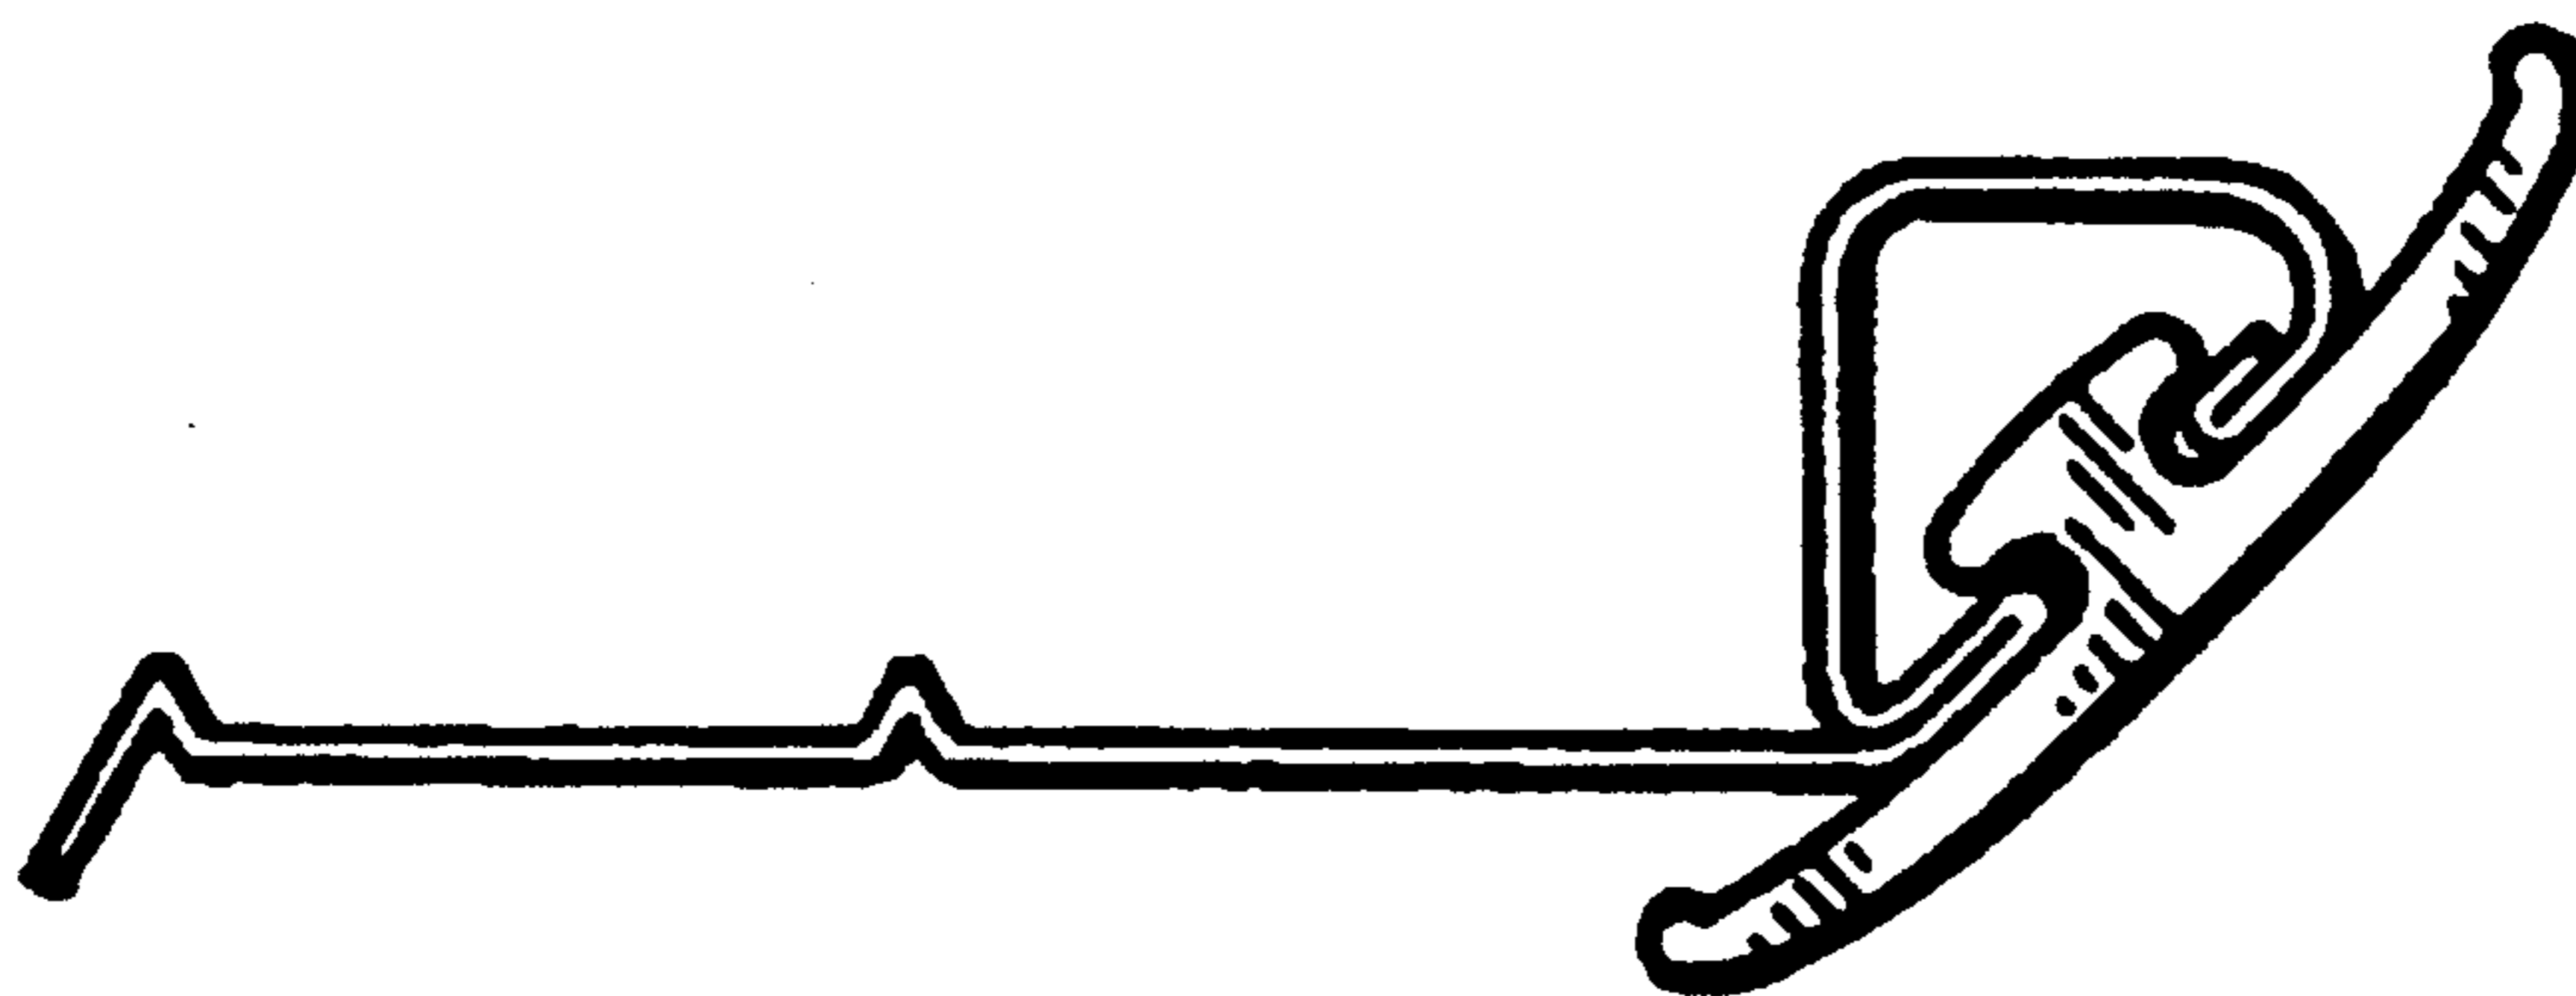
is a front elevational view of a molding with retainer strip for an overhead door showing my new design;
